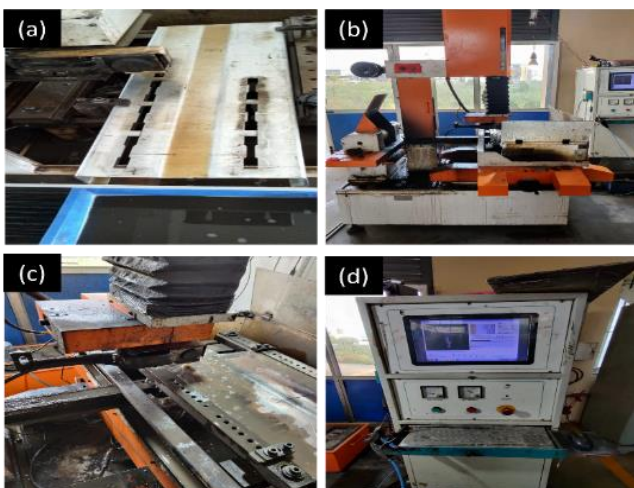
(a) Specimen being extracted from EDM, (b) Wire EDM machine, (c) Cutting process, (d) Input for Wire EDM machine.
